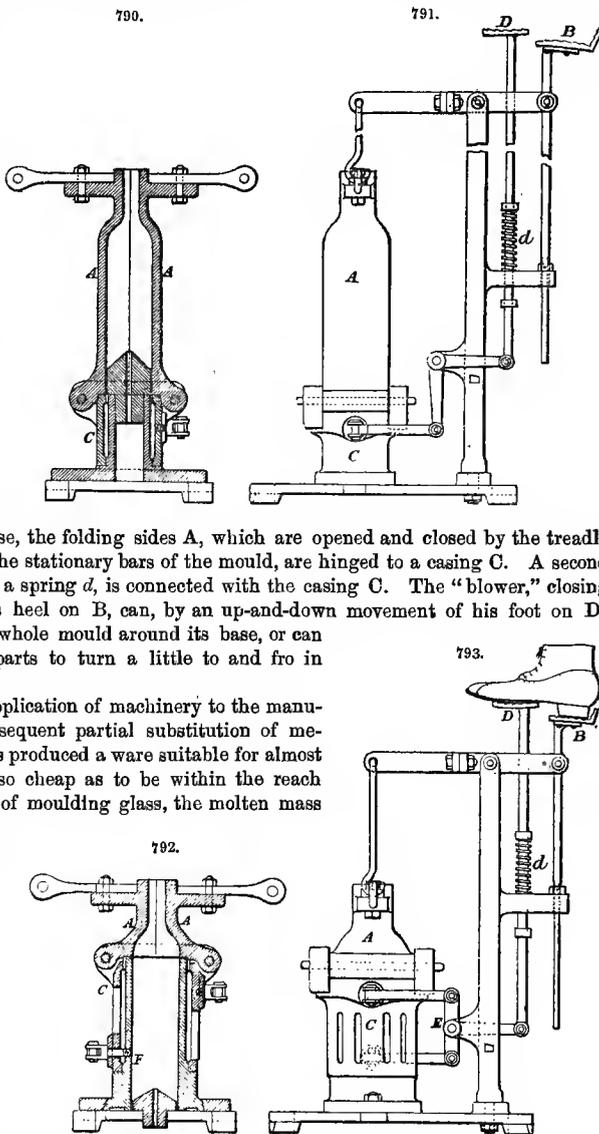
is a vertical section, and Fig. 791 a side elevation, of a bottle-mould hinged at the bottom; Fig. 792 is a vertical section, and Fig. 793 a side elevation, of a bottle-mould hinged at the shoulder, with apparatus for giving the mould a partial rotation whilst the bottle is being blown.
